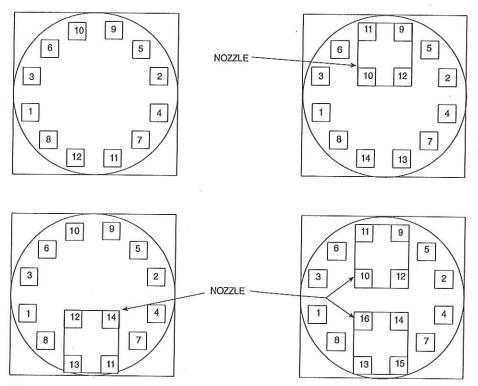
Cooler and Condenser Head Recommended Bolt Torque Sequence
